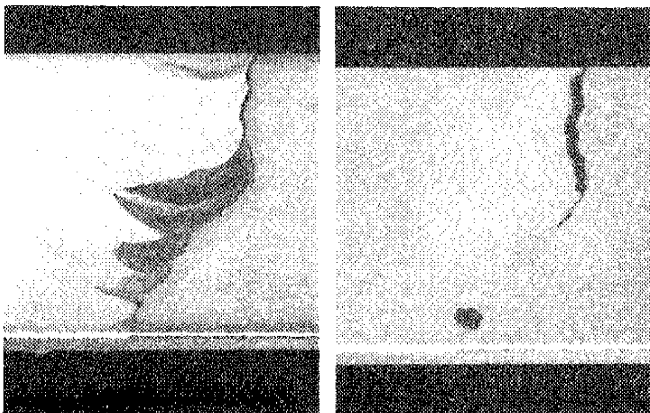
Cross section of pipe weld involving 18 cr - 8 Ni 2 Mo stainless weld deposit on 2½ Cr-1 Mo alloy steel. Crack delin-
